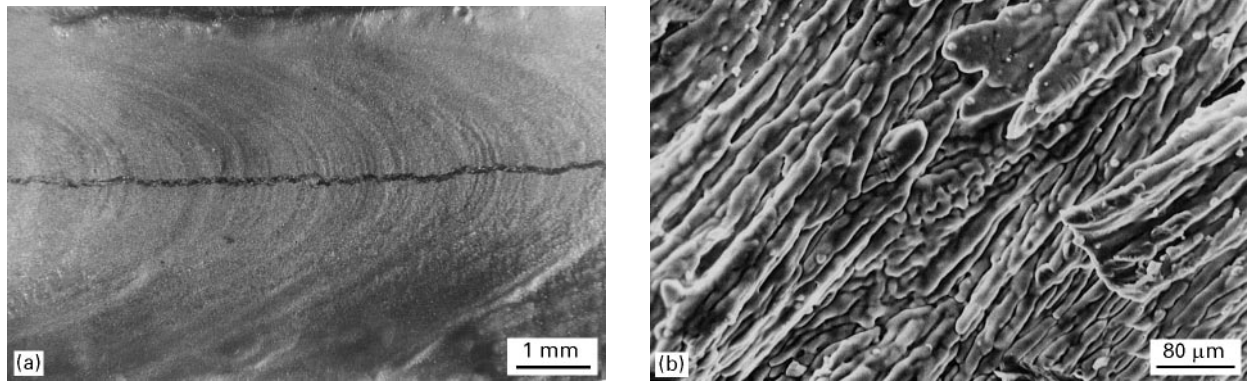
(a) Weld centre line crack in a continuous current weld, (b) crack surface.
